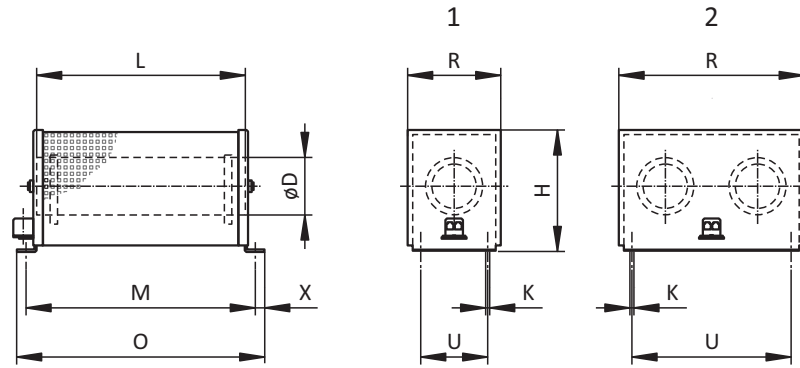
FZMU (1), FZZMU (2) dimensional drawing
